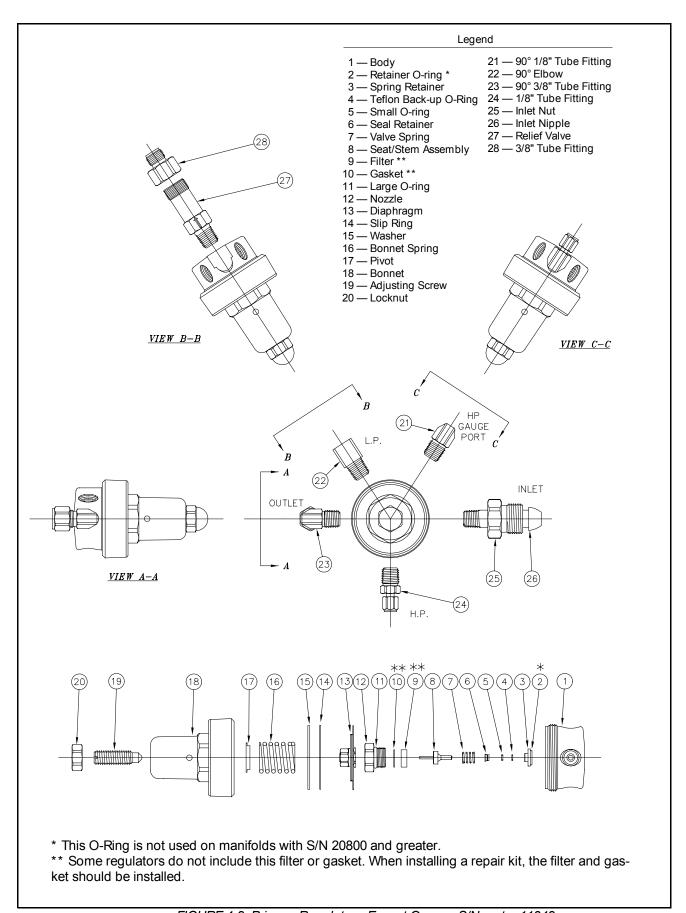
Primary Regulator - Except Oxygen S/N up to 11348
